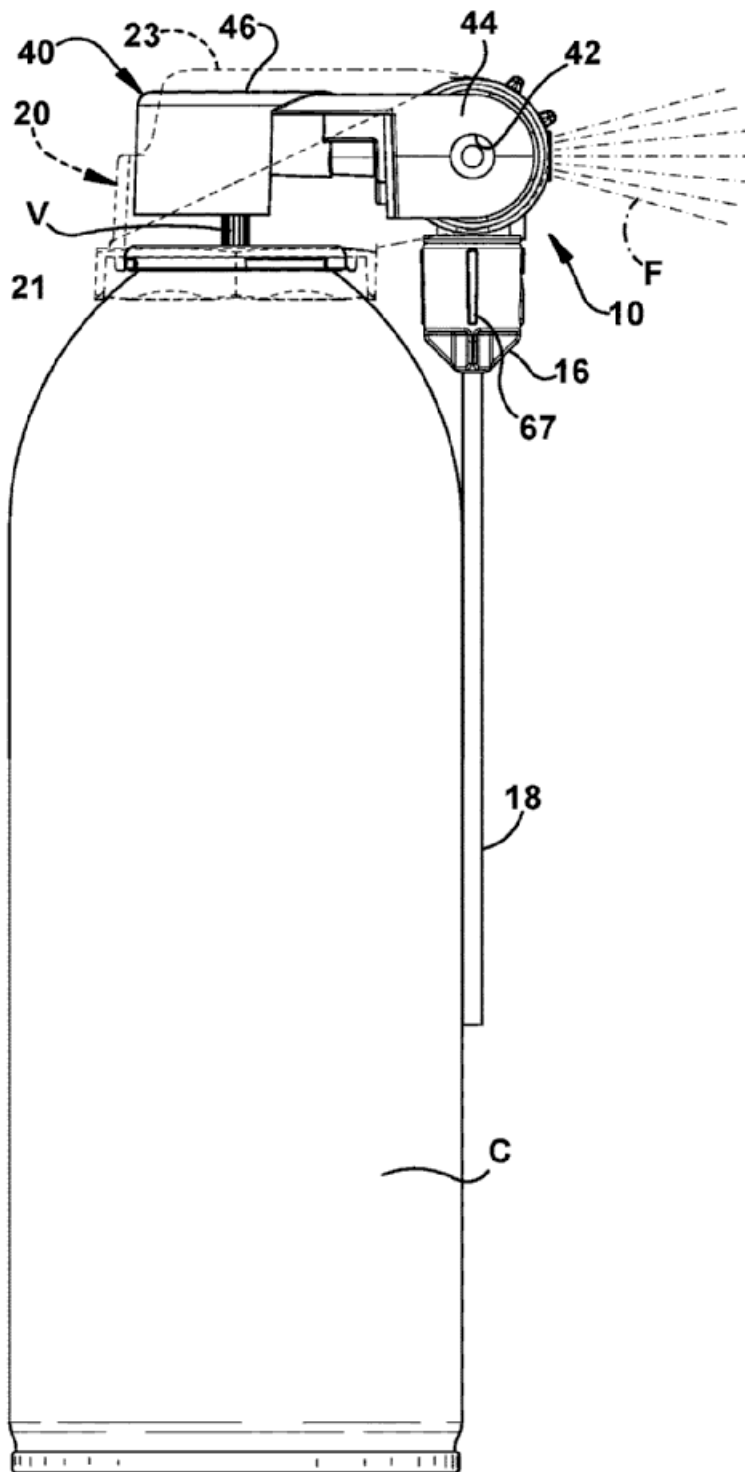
illustrates a downward position of an outlet tube (18) supplied by a rotatable valve assembly.
